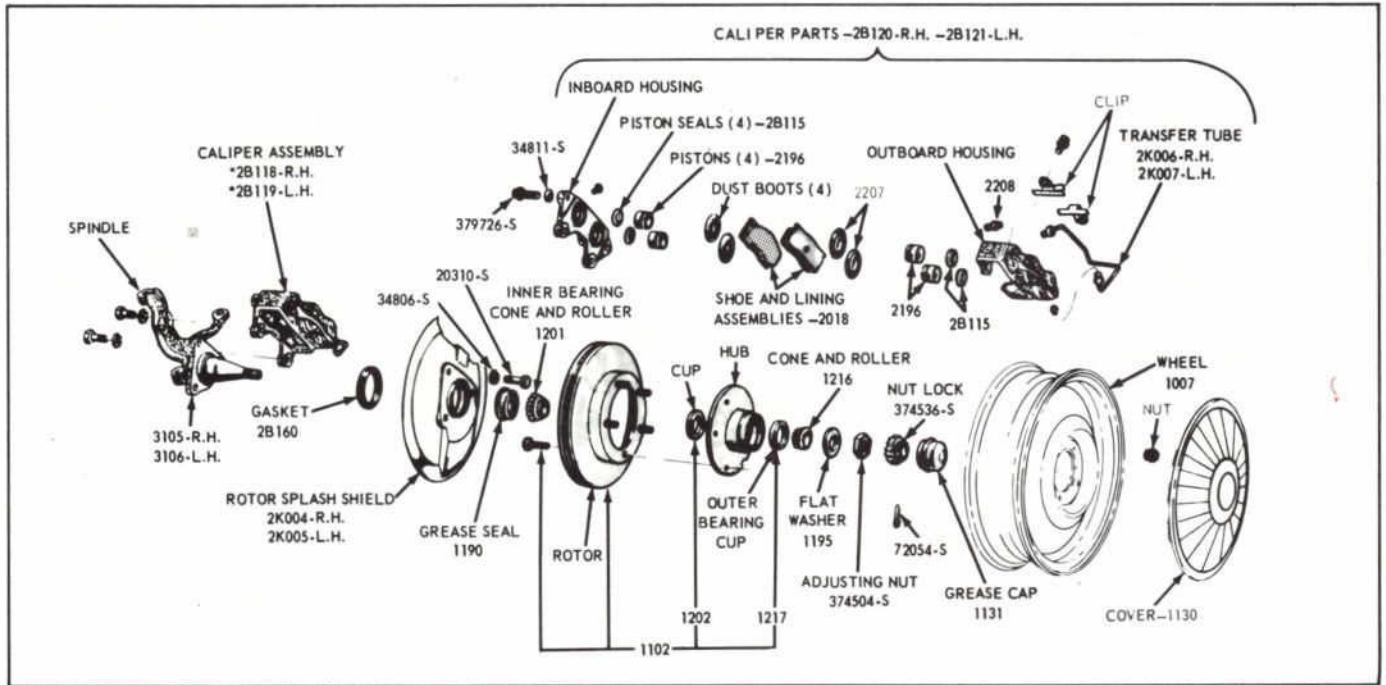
Fixed Caliper Disc Brake—Exploded View With Basic Part Numbers
